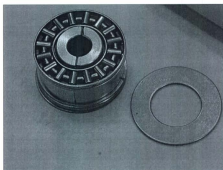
Thrust shaft keepers, washers and roller bearing cages.
